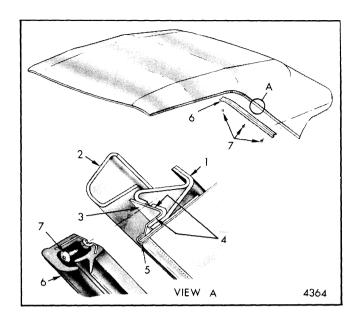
Side Roof Rail Rear Weatherstrip and Quarter Retainer Attachment
